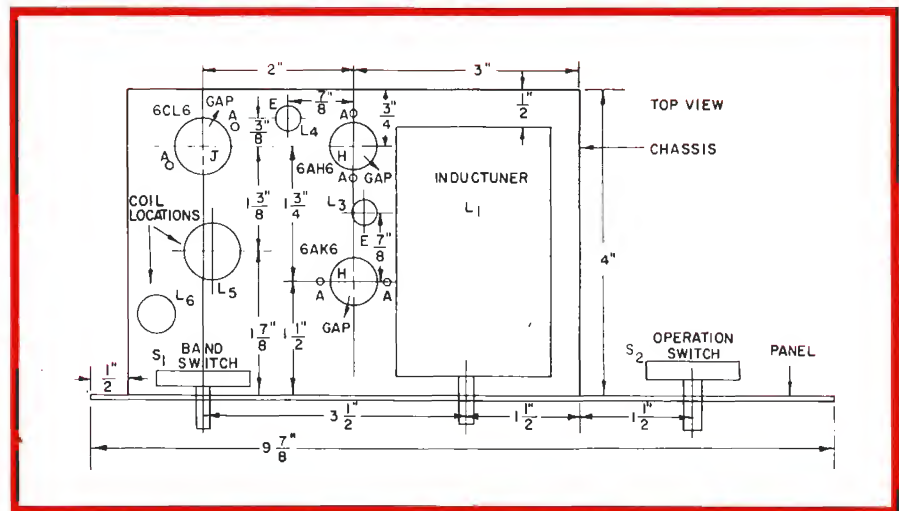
CHASSIS LAYOUT DIAGRAM for the inductive-tuned VFO exciter. Locations for coils L_2 and L_3 are also shown. Holes marked "A" are No. 31 drill for No. 4 machine screws; those marked "E" are $\frac{3}{32}$ of an inch in diameter for the mounting studs on L_2 and L_3 .
